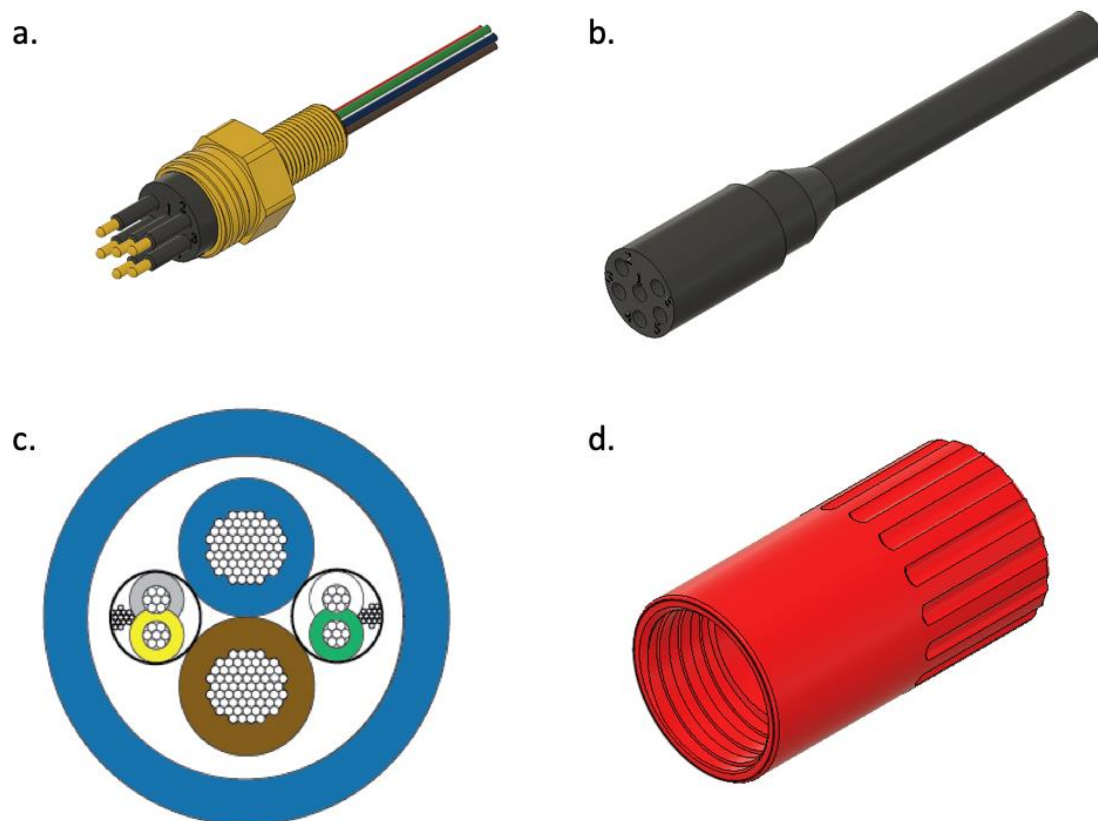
Sensor cable component images. (a) MCBH6M Subconn Bulkhead connector. (b) MCIL6F Female Cable connector. (c) Cross section view of type 2009/B Power/signal cable with two twisted pairs and two solid core power wires. (d) MCDLS-F locking sleeve. Images are provided by MacArtney Underwater Technology (<https://www.macartney.com>).
